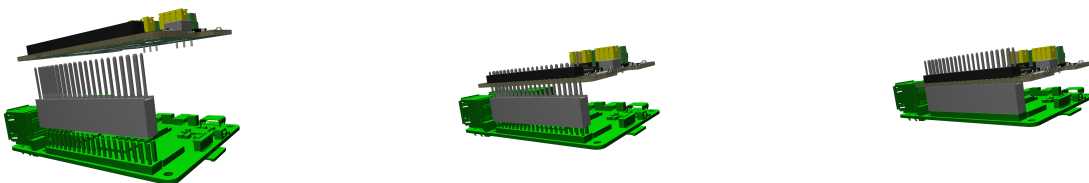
Assembly of the 2x20-pin stackable header between Raspberry Pi and HAT
